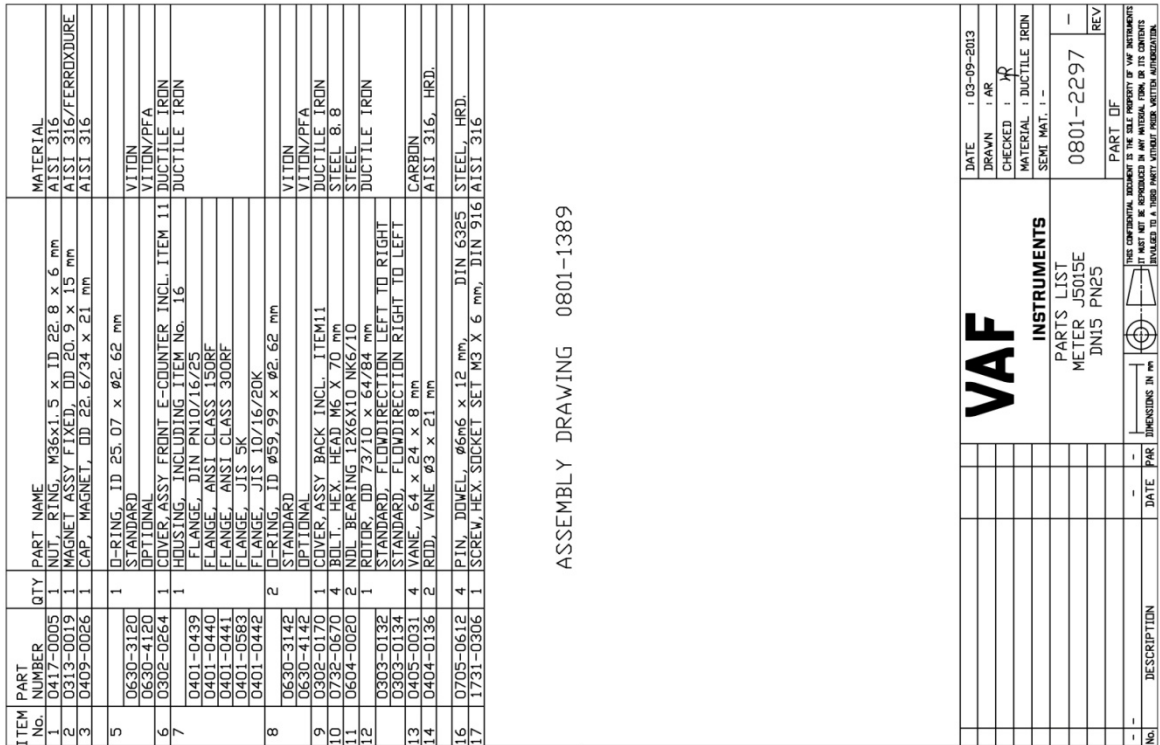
Drawing 0801-2297 – Partslist J5015E DN15 PN25
